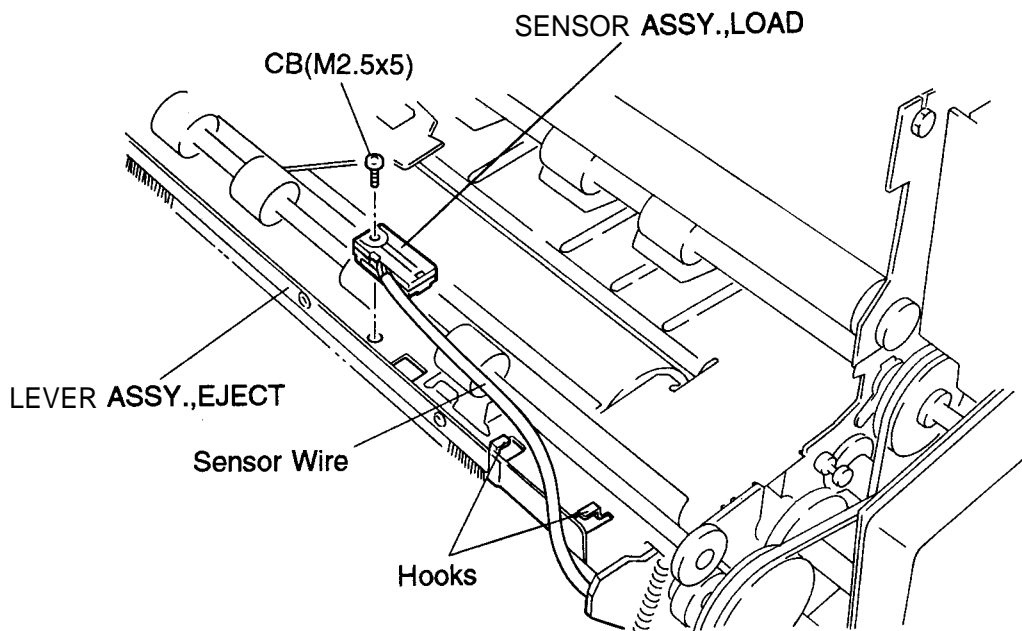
Removing the SENSOR ASSY.,LOAD
